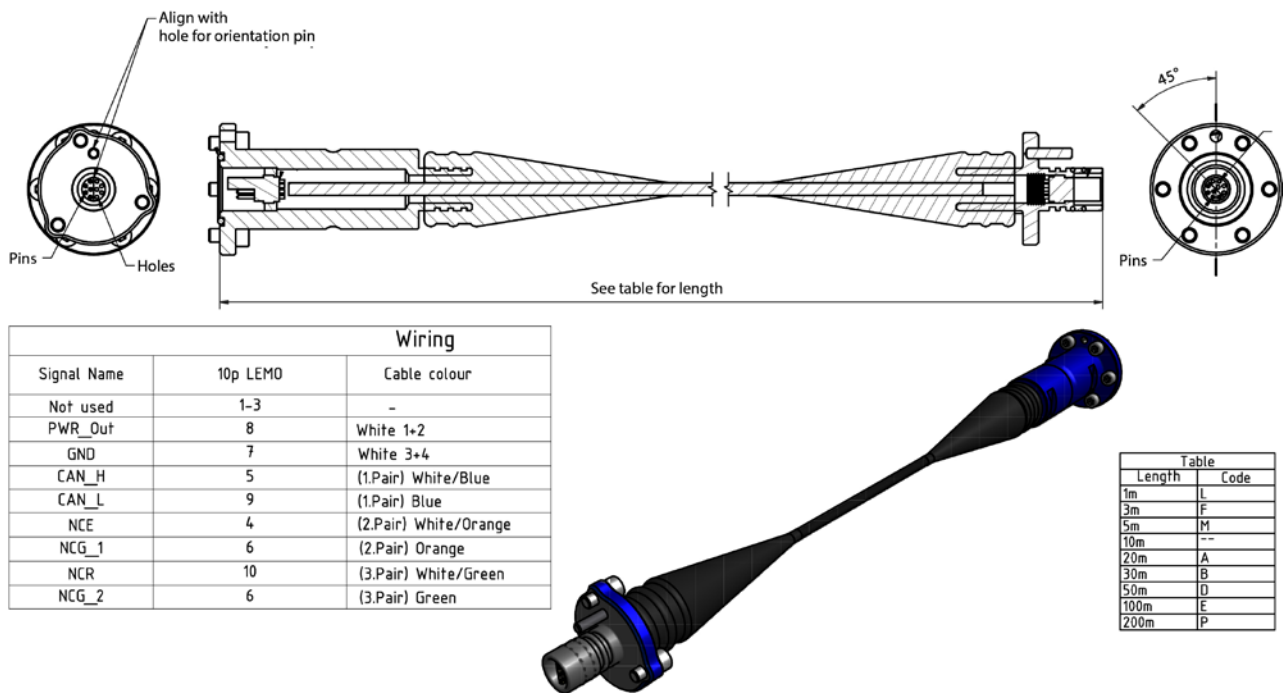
Drawing Remote Sensor Cable 4838, AiCaP
